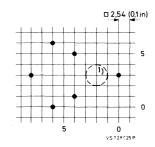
Hole pattern for mounting on a printed-wiring board.
